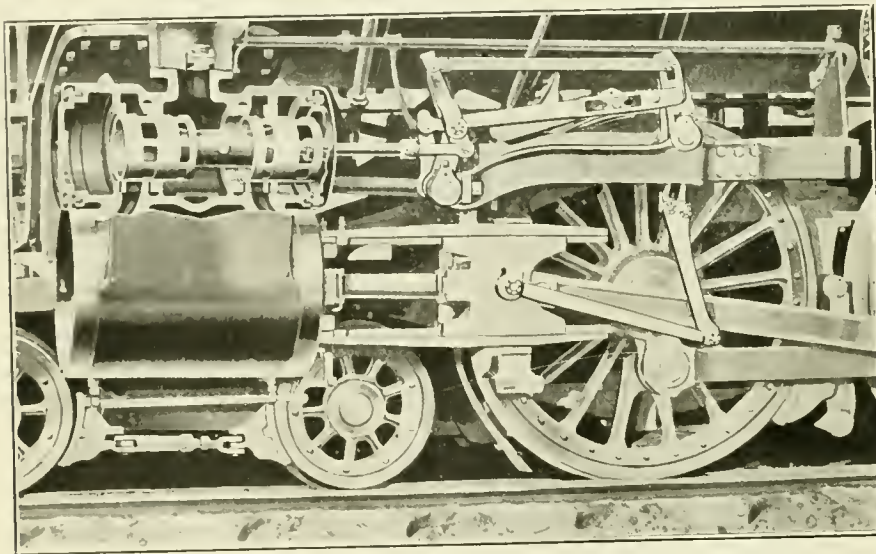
VIEW OF VALVE GEAR APPLIED TO A LOCOMOTIVE WITH VALVE EXPOSED.
